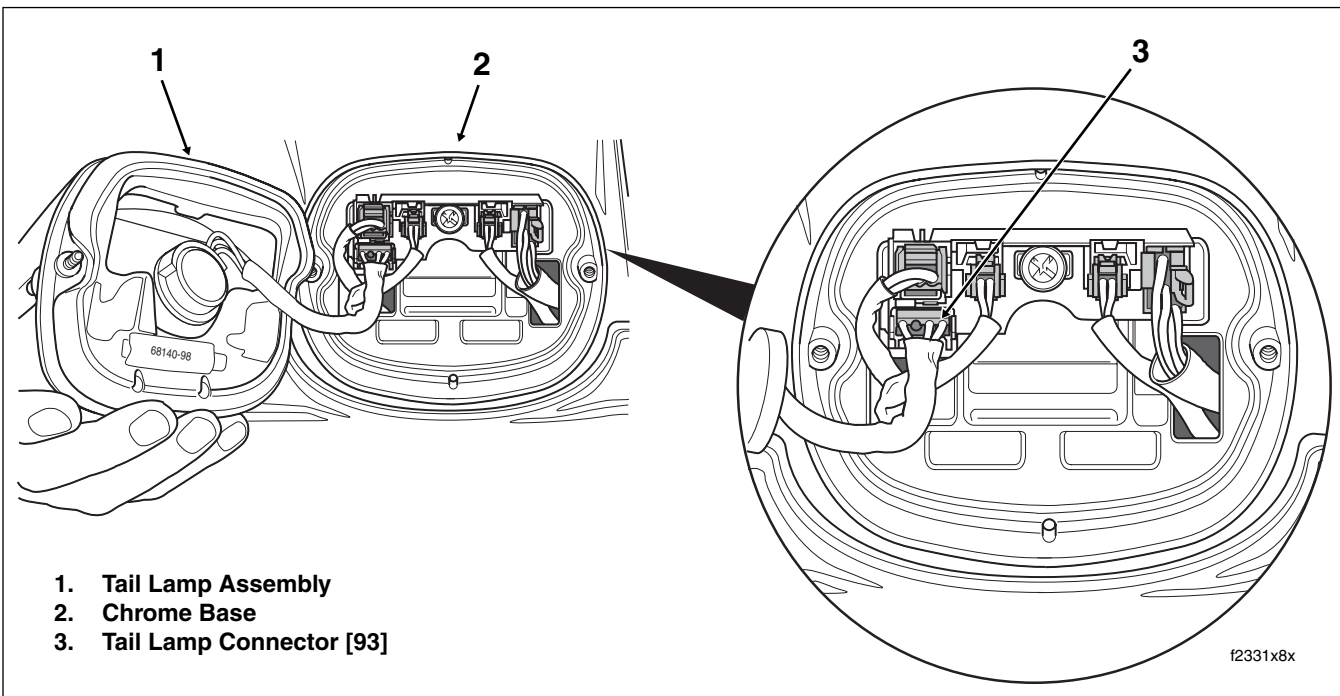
Remove Tail Lamp and Depress Button to Release Socket Housing
